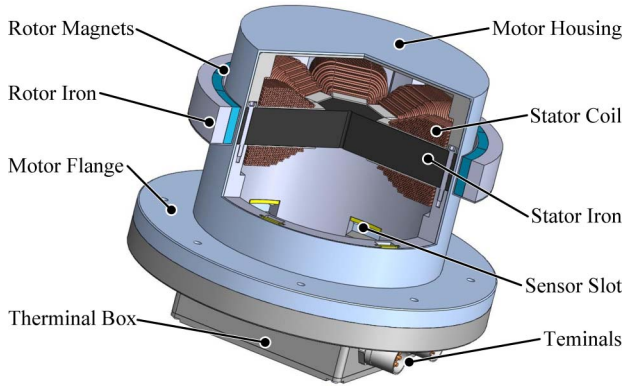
Mechanical motor setup of the bearingless mixer motor.
